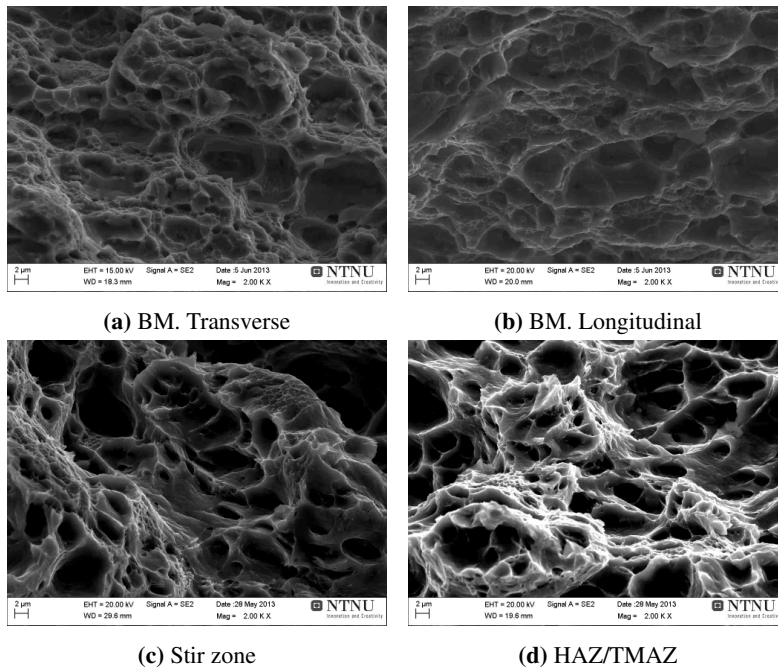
Fracture surfaces images of the FSW Charpy V-notch specimens after testing. (The scale bar in the lower left corner is $2\ \mu\text{m}$)
